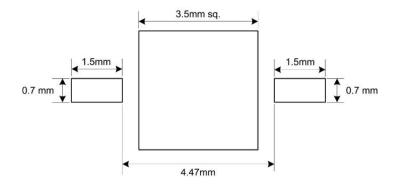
Solder Land Pattern (dimensions are in millimeters)
